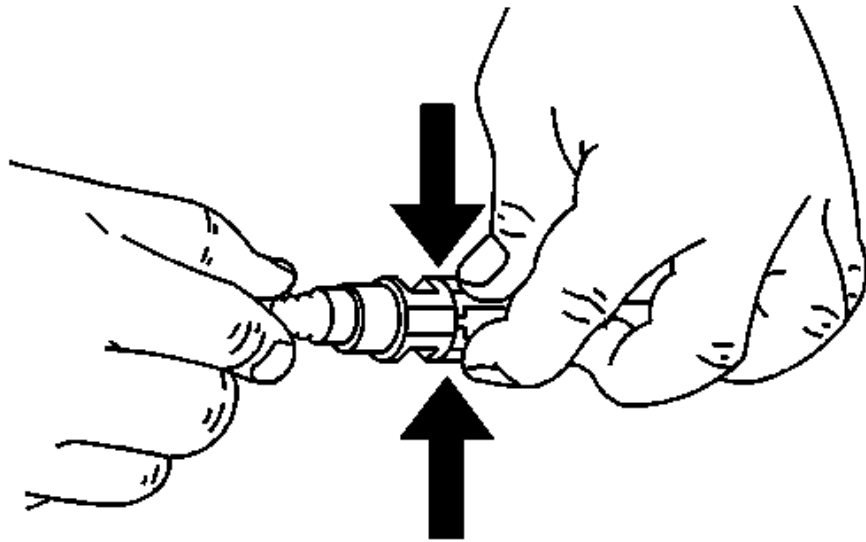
View Of Quick Connect Fitting Release Tabs (Plastic Collar)
